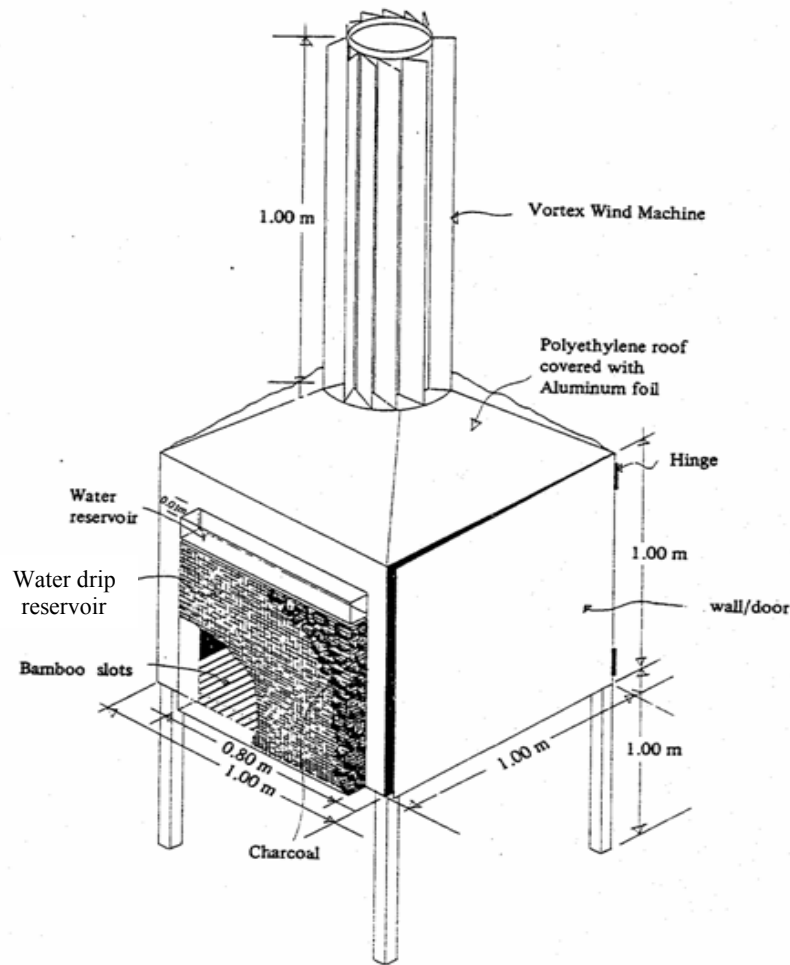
Drip-type evaporative cooler equipped with vortex wind turbine
